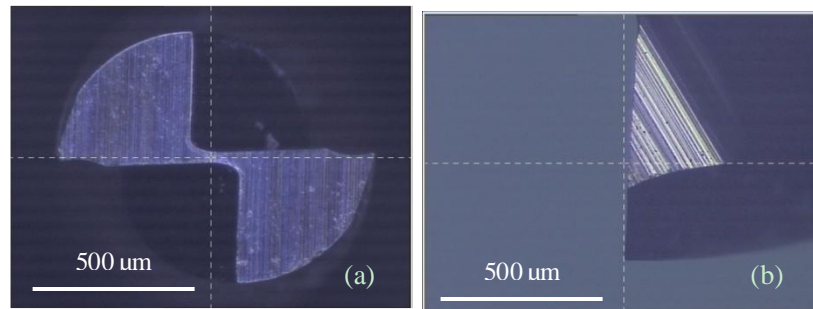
Geometry of a new micro-milling tool (SGS41505) (a) bottom face (b) rake face
